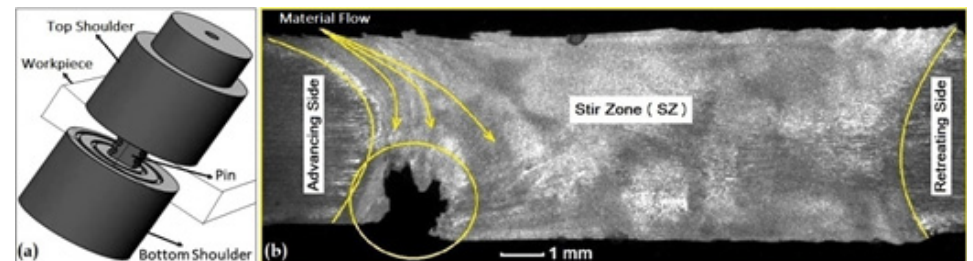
(a) Schematic of bobbin tool, (b) Macroetched cross-section of the BFSW Aluminium weld.
